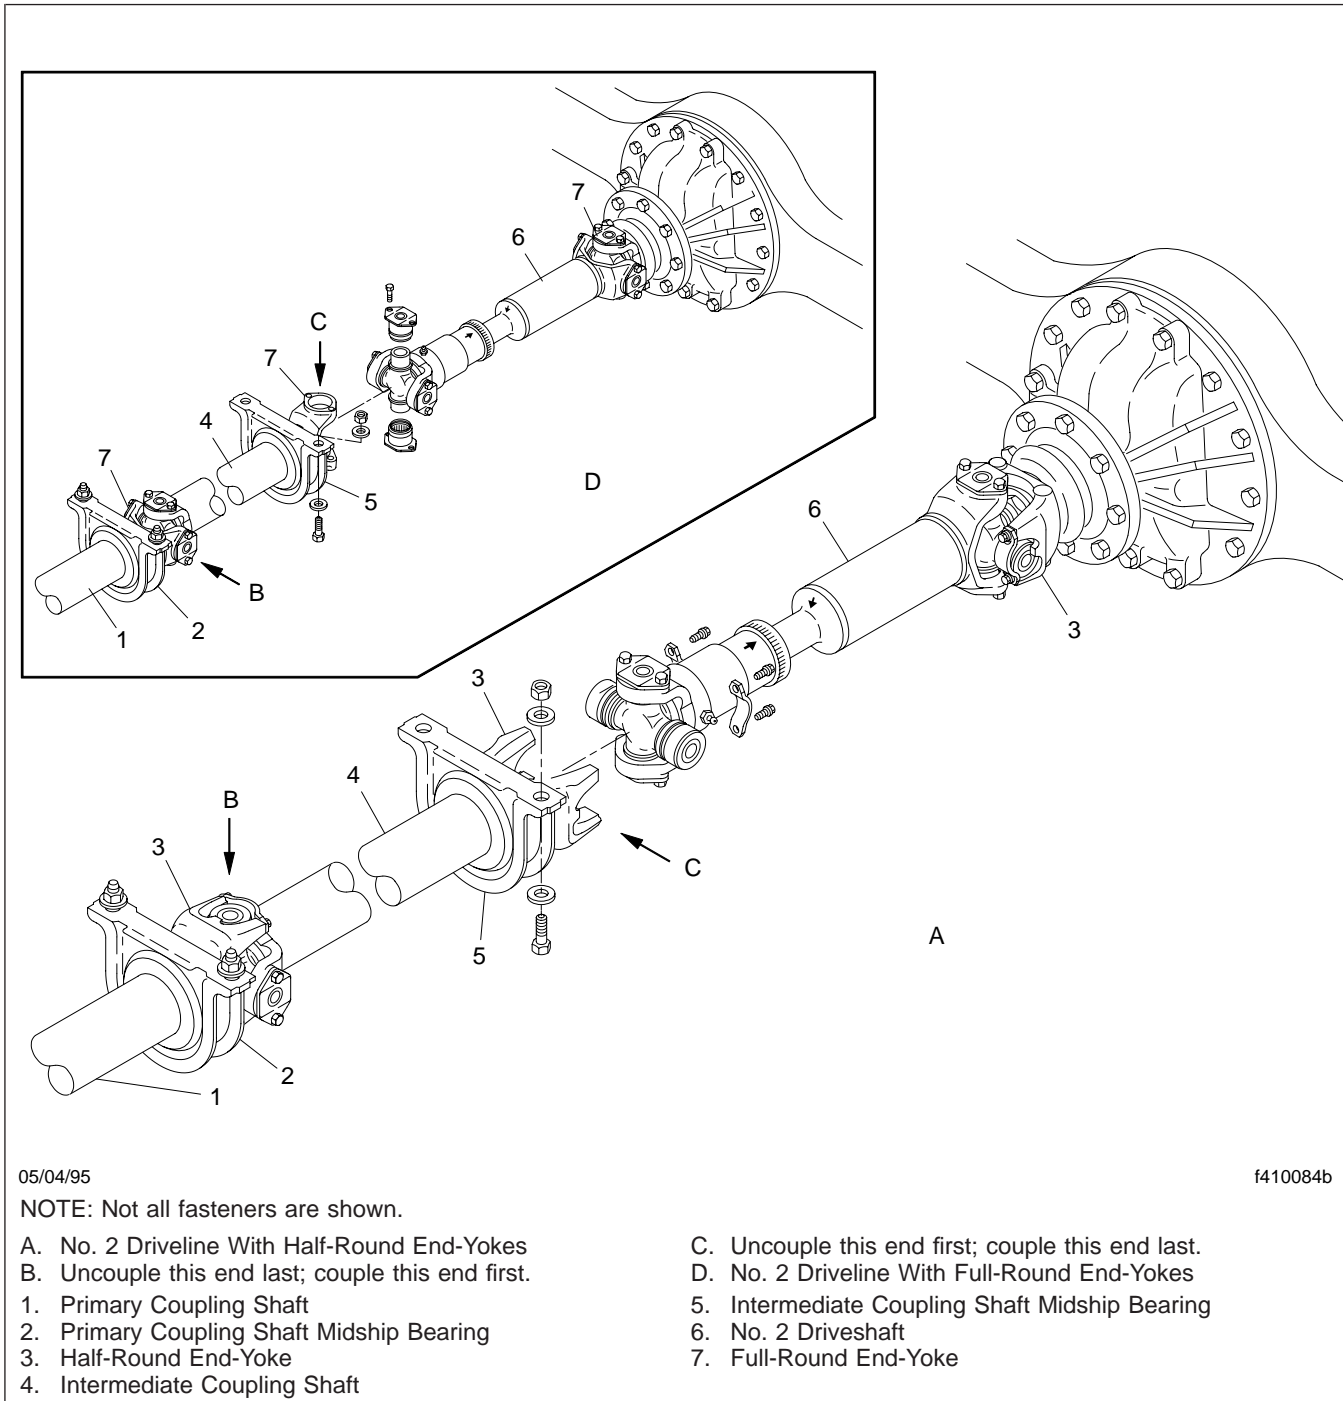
, Removal/Installation of an Intermediate Coupling Shaft Without RPL U-Joints
